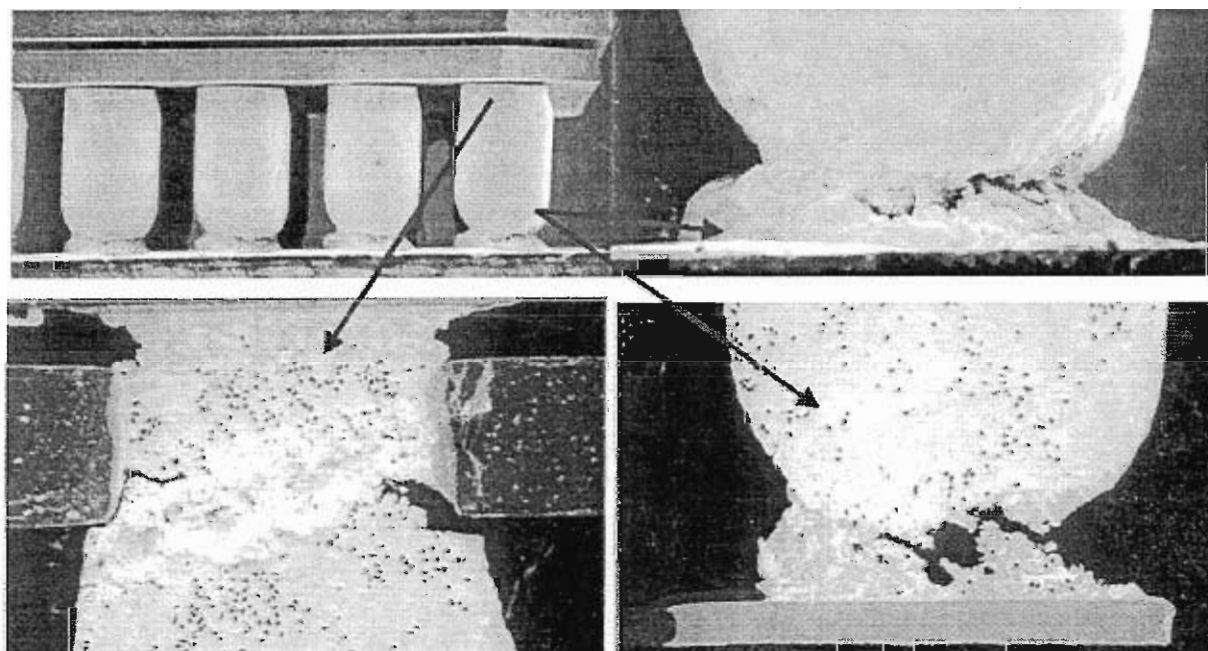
SEM photomicrographs and cross-sections of CCGA560 I/O assembled with tin-lead solder after thermal cycling showing damage/cracks
